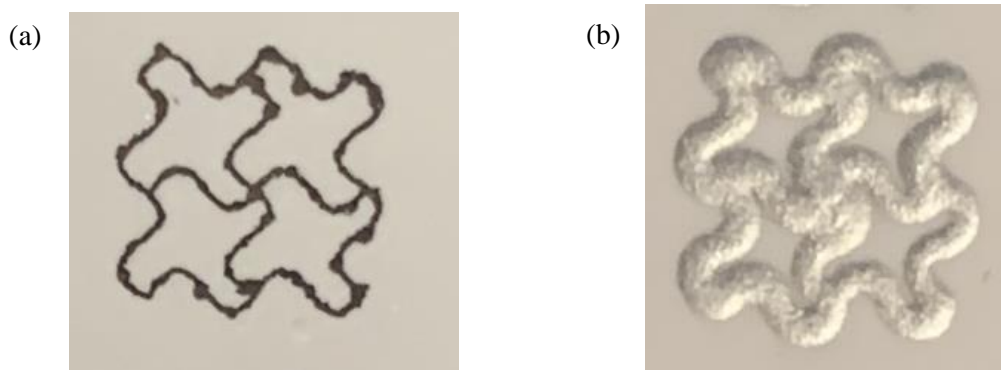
Spiral matrix formed using (a) inkjet, and (b) extrusion printing
